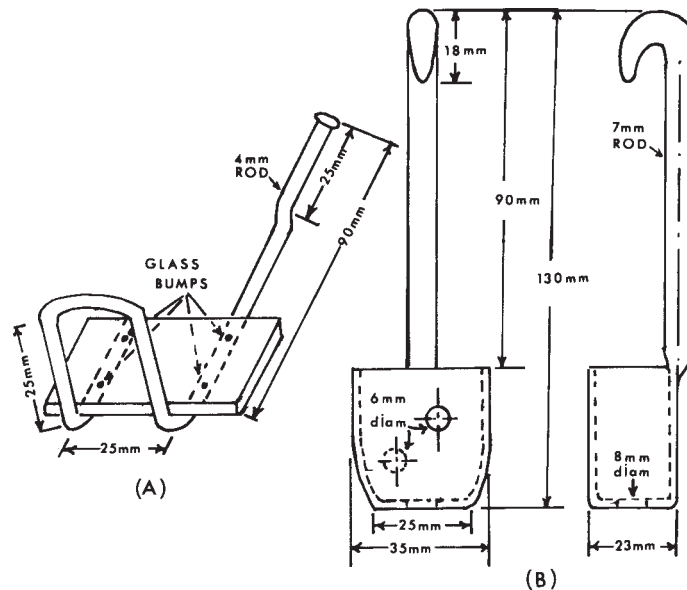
Examples of Glass Cradles that Can Be Used to Support the Specimen
